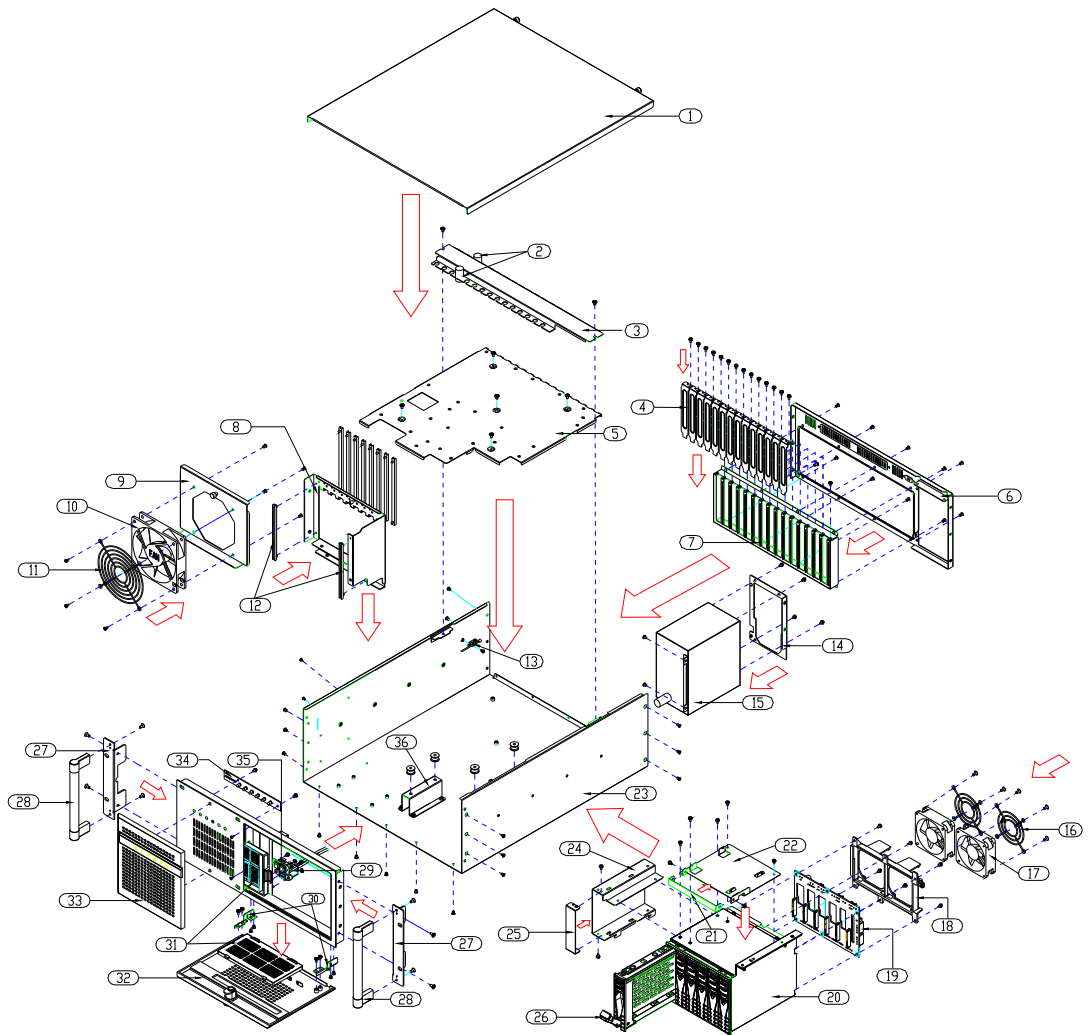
Exploded Diagrams& Parts List/ 分解图 & 部件列表 / 分解圖 & 零件表
